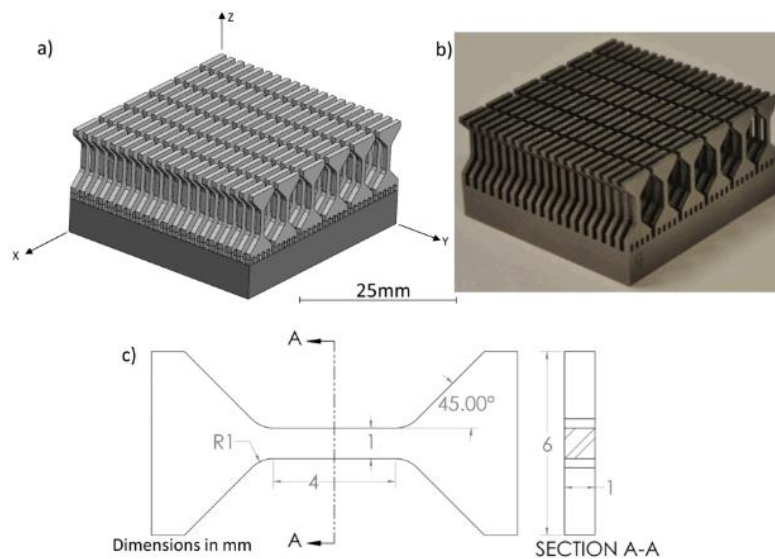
(a) Build Array of 120 Tensile Specimens. (b) Printed array of 120 Tensile Specimens. (c) Tensile Specimen Geometry [6].
